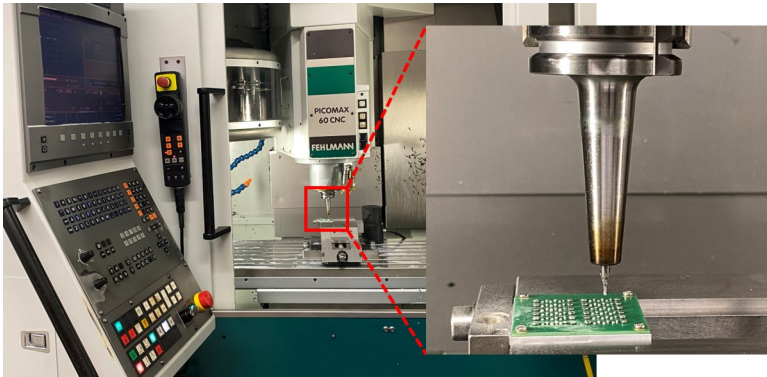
Mechanical cutting tool to cut out the electrical clamps. The coordinates from the design file for the pcb board with electrical clamps can be loaded in this system and the cutting procedure is automated.
